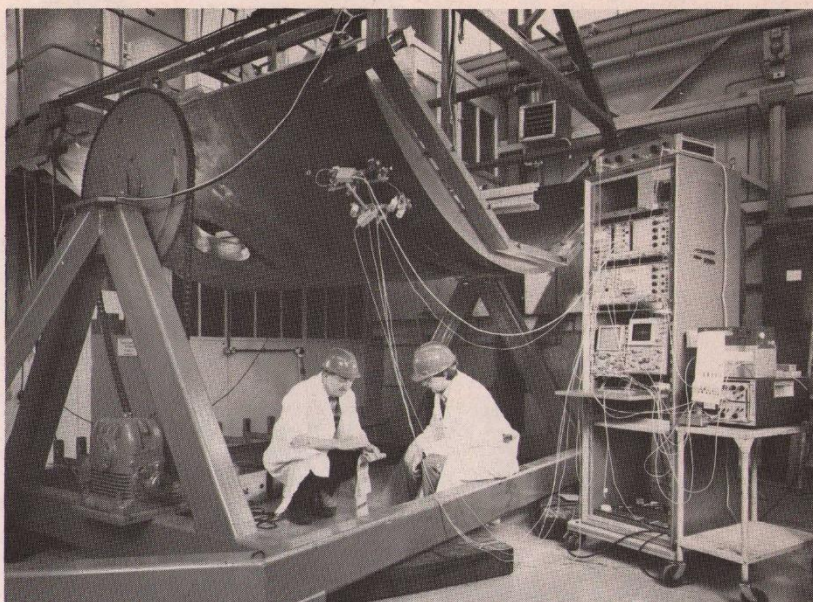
An inspection crawler moving over the under surface of a large pressure vessel forging. The crawler was designed at the National NDT Centre
